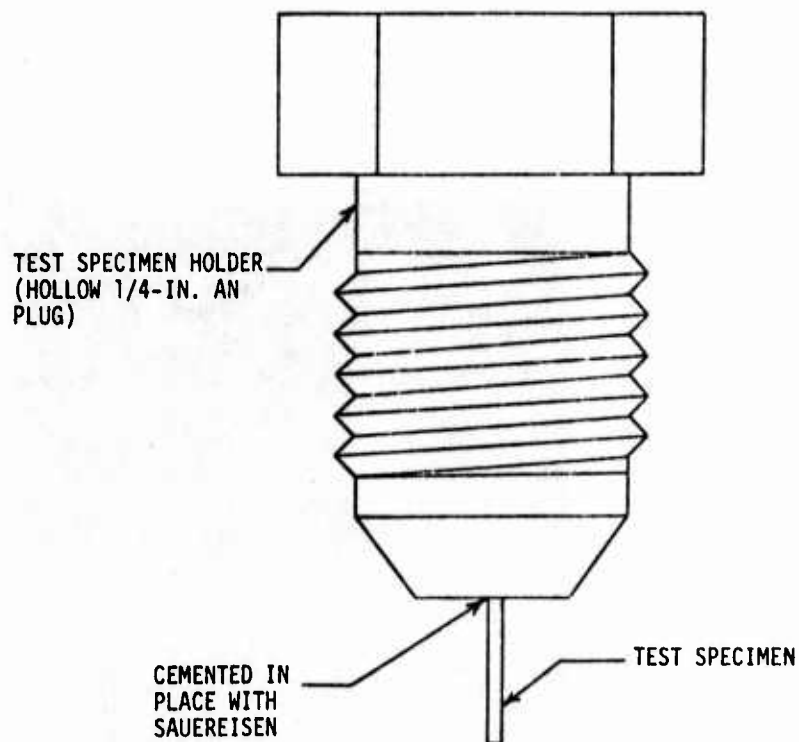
Schematic of Test Specimen Holder with Test Specimen in Place
